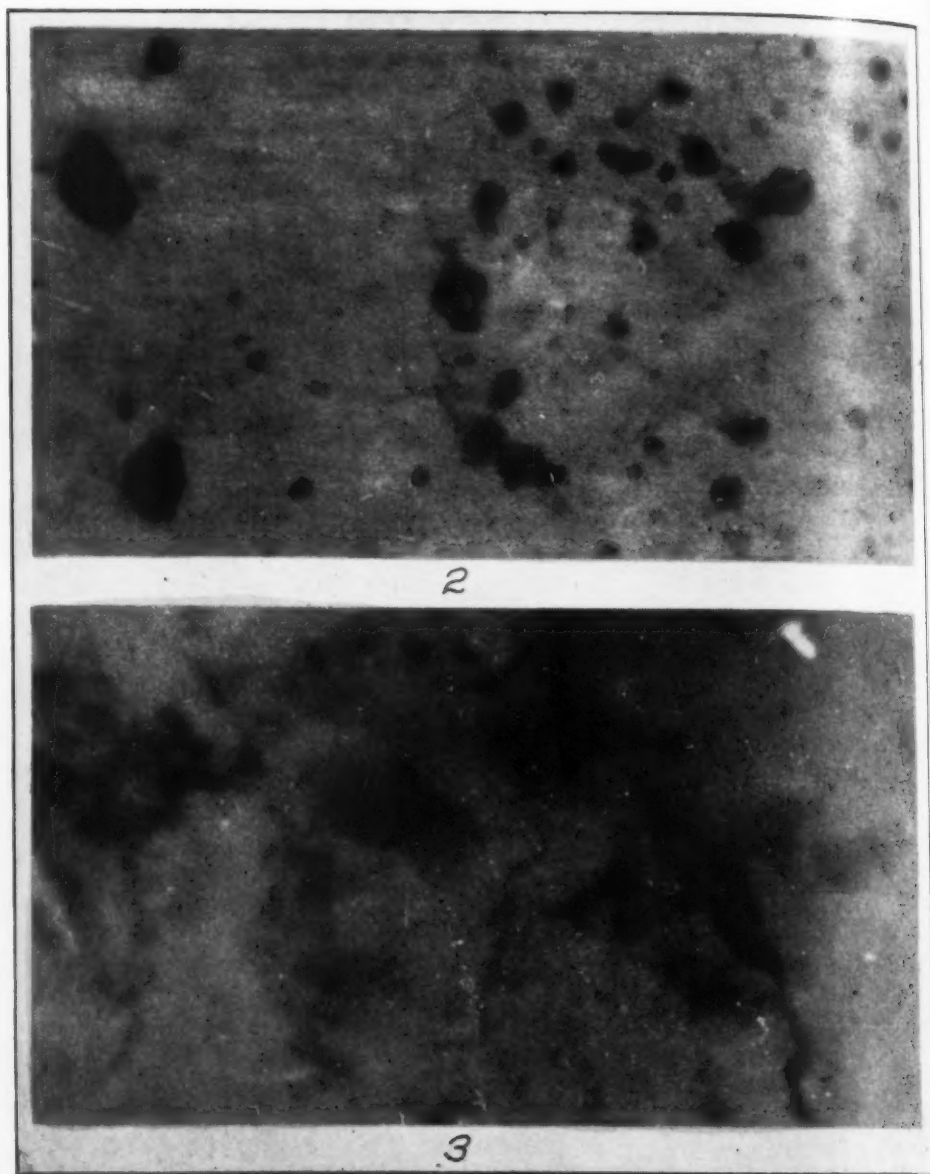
Radiograph of a Steel Casting Showing Gas Pockets Caused by Dirt Trapped in Mold. Fig. 3—Radiograph of Steel Casting Showing Dirt and Gas Trapped in Horizontal Cope Section where there was No Flow of Metal toward the Riser. The Dark Areas are either Voids or Inclusions and are Negative Reproductions of the Original Film, that is, they are not Positive Prints from the Original Radiographic Film. All of the Radiographs Accompanying this Paper are Negative.
